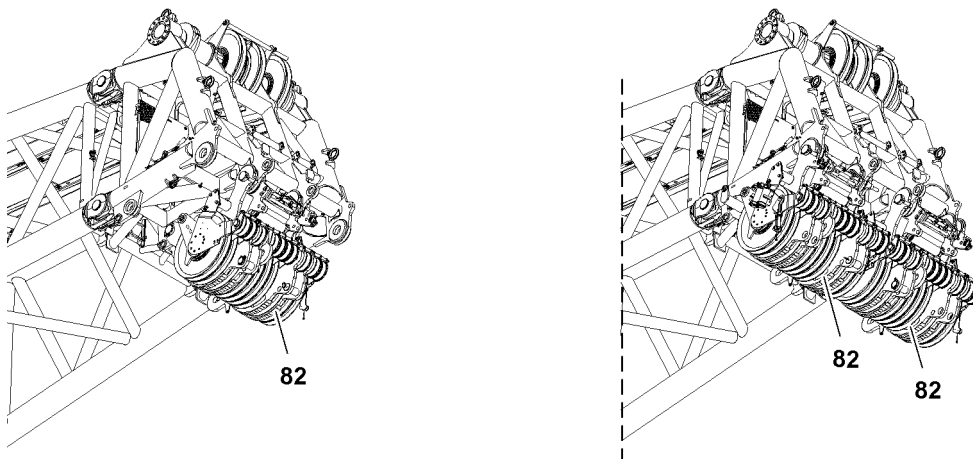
Assembling the placement pins — L-end section with one roller set and L-end section with two roller sets
